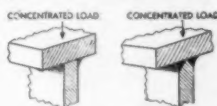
Joint between heavy flange and web, showing machined edge (at left) and full weld (at right).
